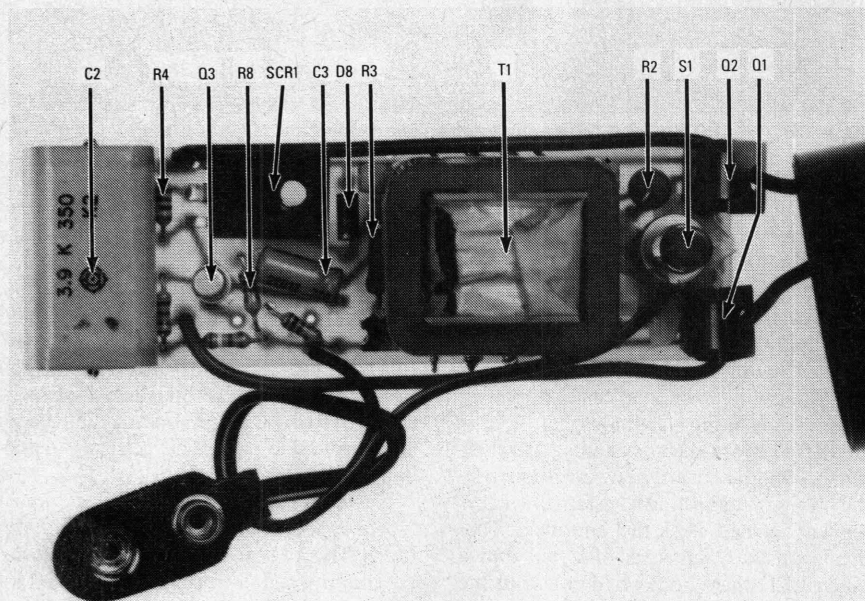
BEND SCR1'S LEADS 90° so that the nomenclature faces up and then solder the SCR to the board. Also note that C3 must be bent over at a 90° angle, and that R2 is mounted vertically.
